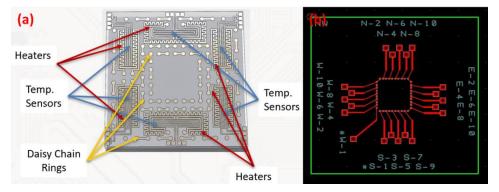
(a) Die side features (b) PCB design for test vehicle 2.
